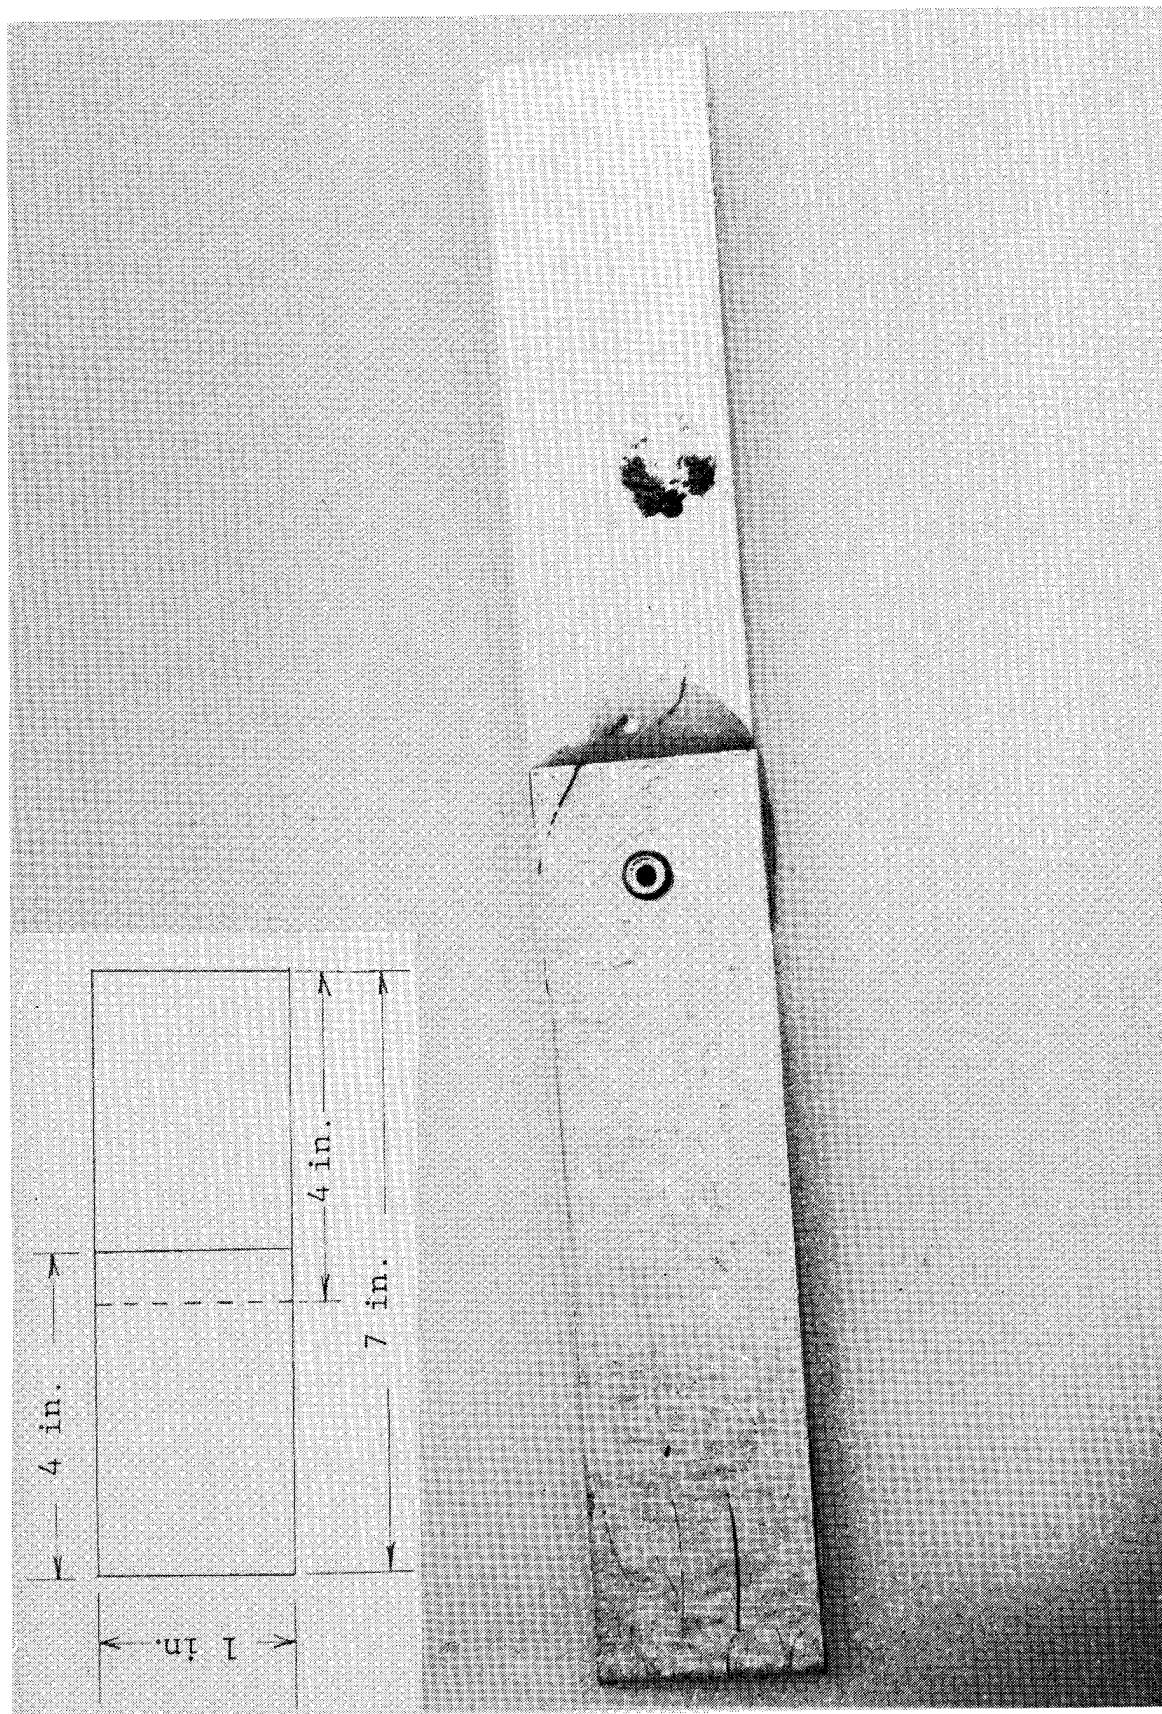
Bonded Aluminum Lap Joint Specimen.
